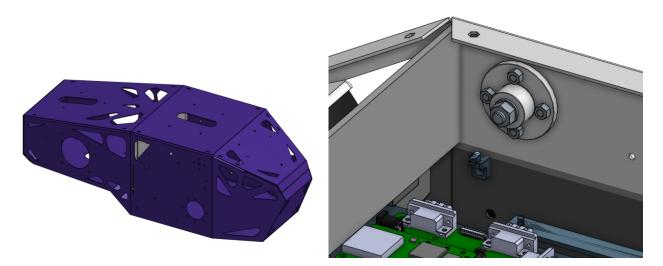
(Left) Aluminium chassis body, (Right) Shelf supports for electrical components
